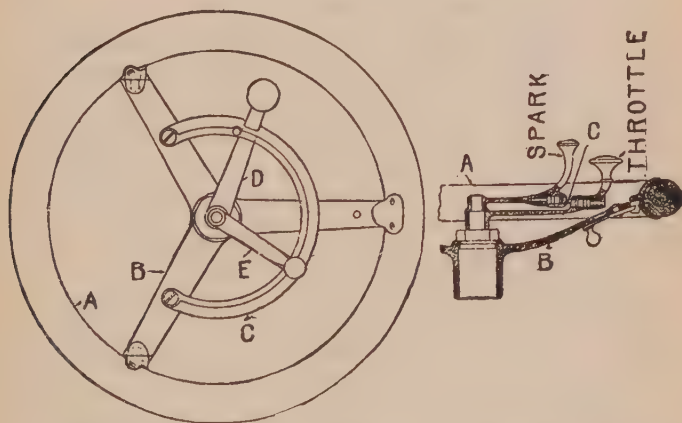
Steering wheel and attachments. A is the wheel rim; B, a spoke or arm of the three arm spider; C, sector for sliding arms, D and E; D, throttling arm and handle; E, spark regulating handle. The throttle is opened by moving the handle clockwise around the sector; the spark is advanced by moving its handle in the same direction.
